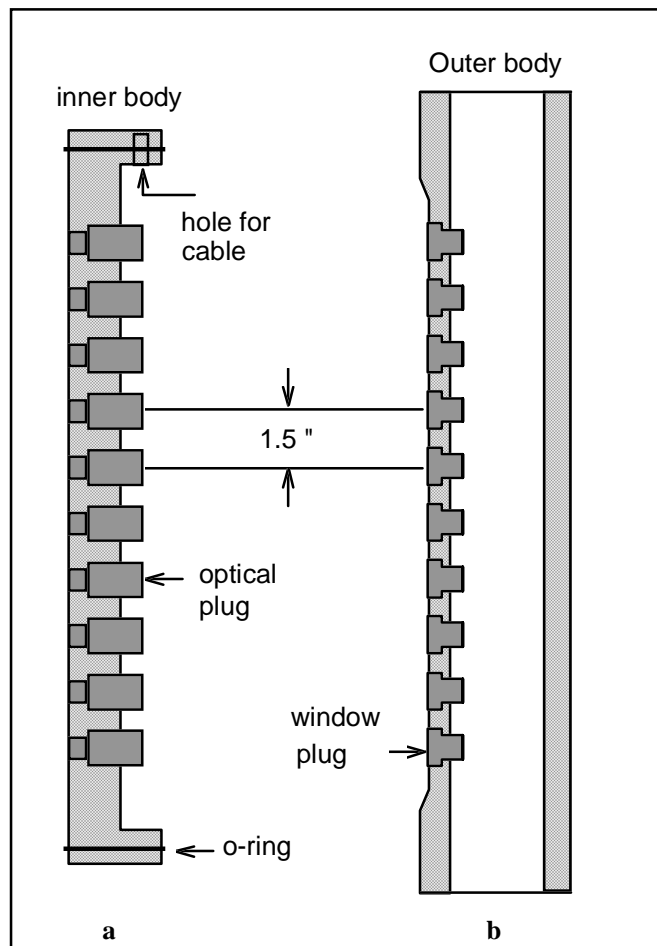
Probe inner (a) and outer (b) bodies, window and optical plugs.
